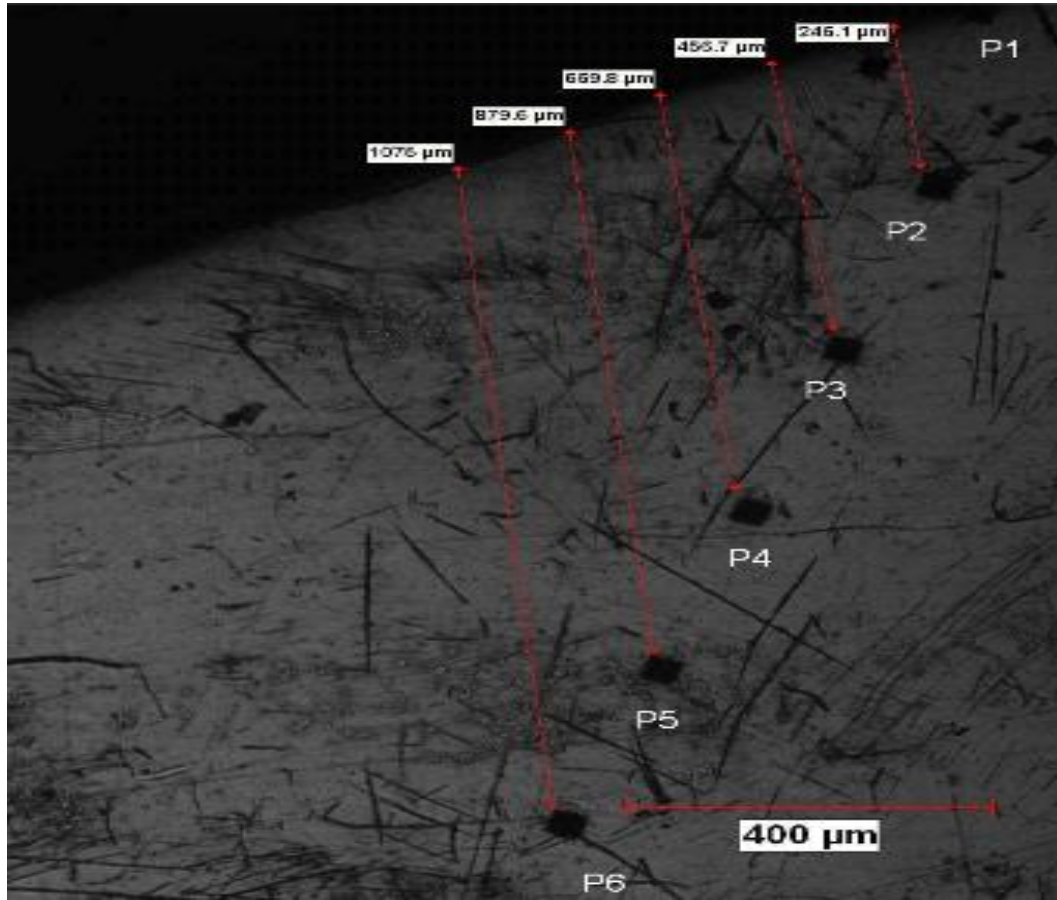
Micro-indentations on the machined surface of AISI 316 steel under MQL cutting condition.
